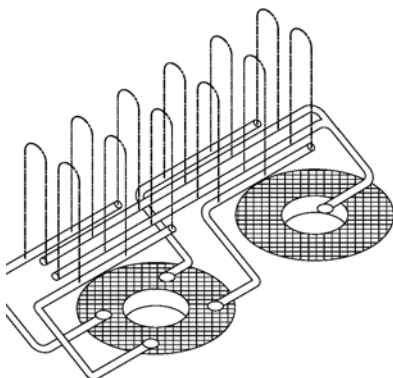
Connection between heater and regenerators - improved design for the eight-cylinder Stirling engine
